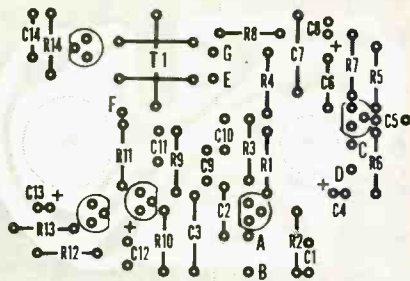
Actual size drawing of foil side of printed circuit (left) will help you make your own board. Parts are installed on the plain side of the board as shown above. Figure 4 shows parts assembled on board.
